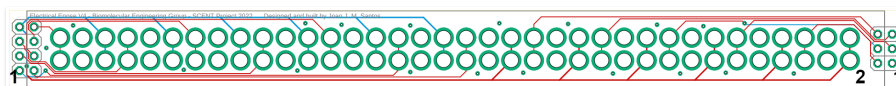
Adapter PCB design. Labels: 1-sensor signal connectors; 2-card-edge connector footprint.
